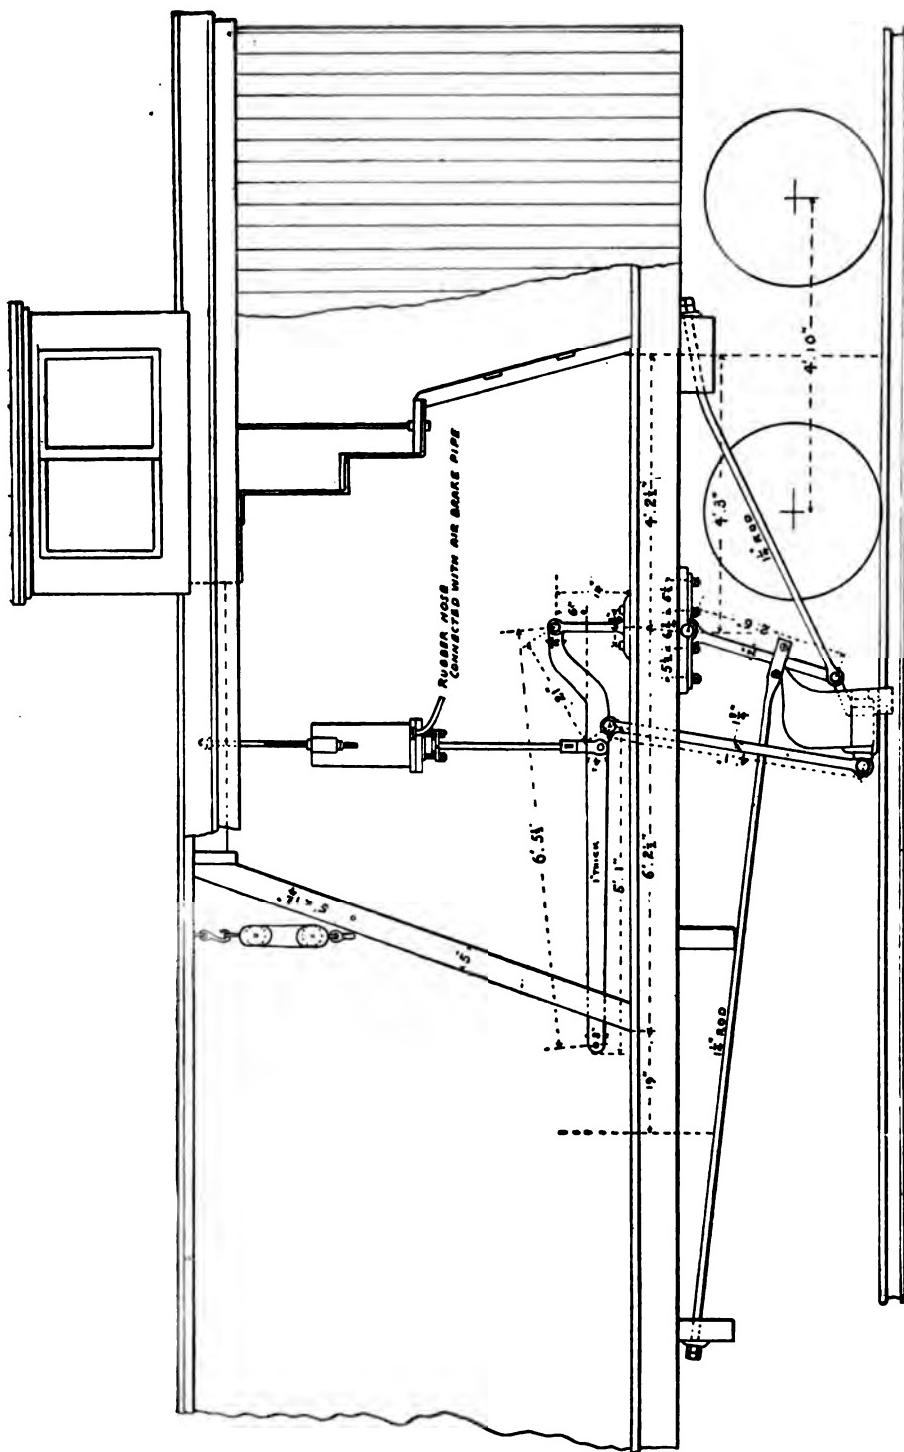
FLANGING CAR, N. Y., W. S. & B. R. R.: SIDE ELEVATION.
